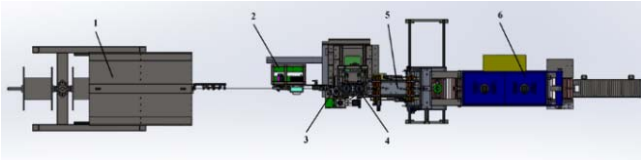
Machine General View 1. Flayer Unit 2. Tension Control Unit 3. Travers Unit 4. Cable Winding Section 5. Pliers Group 6. Shrink Unit
